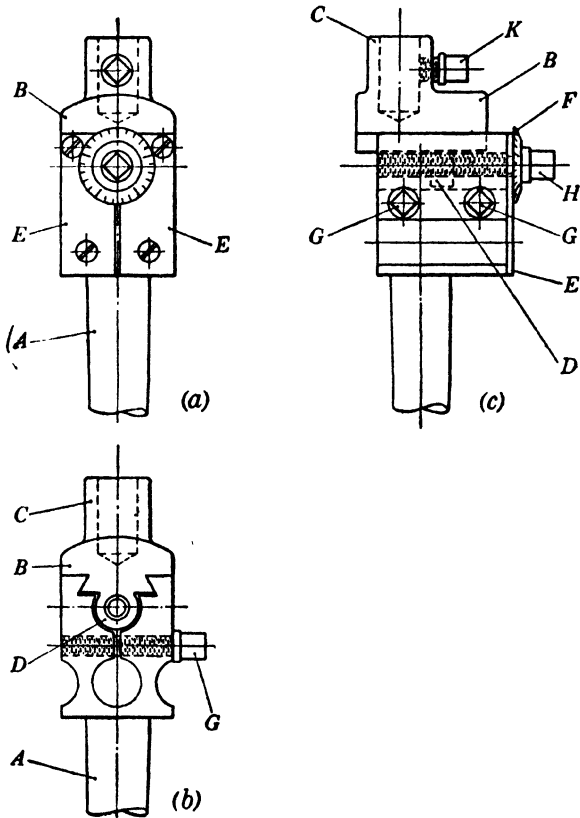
Eccentric cutter holder for boring holes of any given size.
